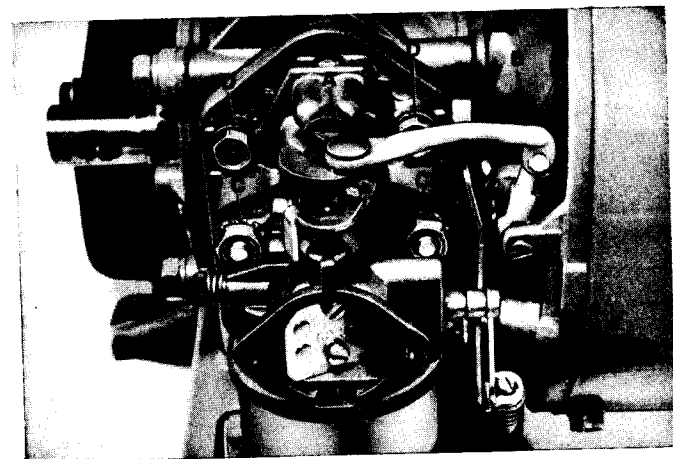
Removal of Governor, Carburetor and Reed Adapter.
